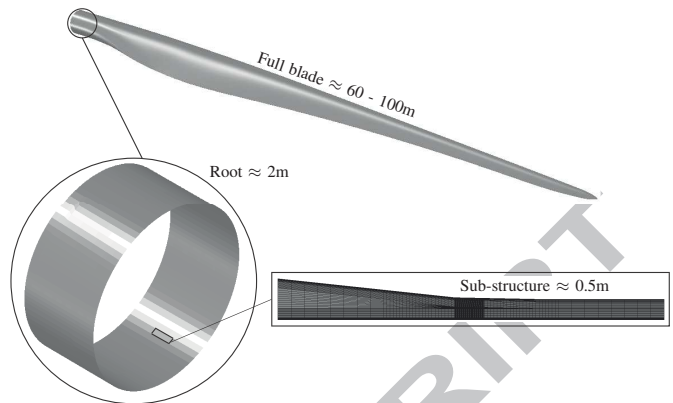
Illustration of scales involved in testing Wind Turbine Blades.
